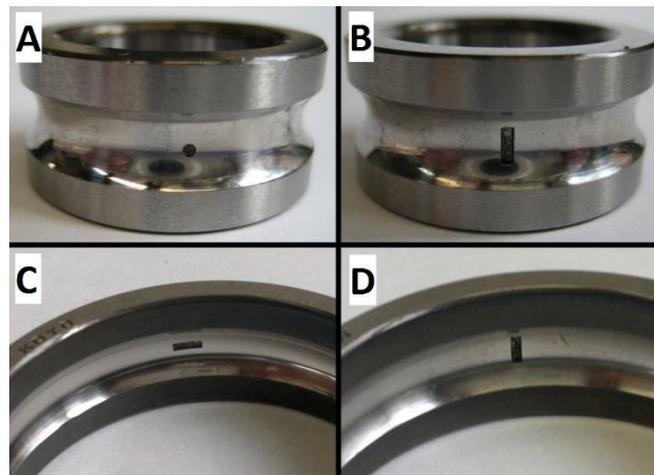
Close-up photos of the introduced bearing damage.
